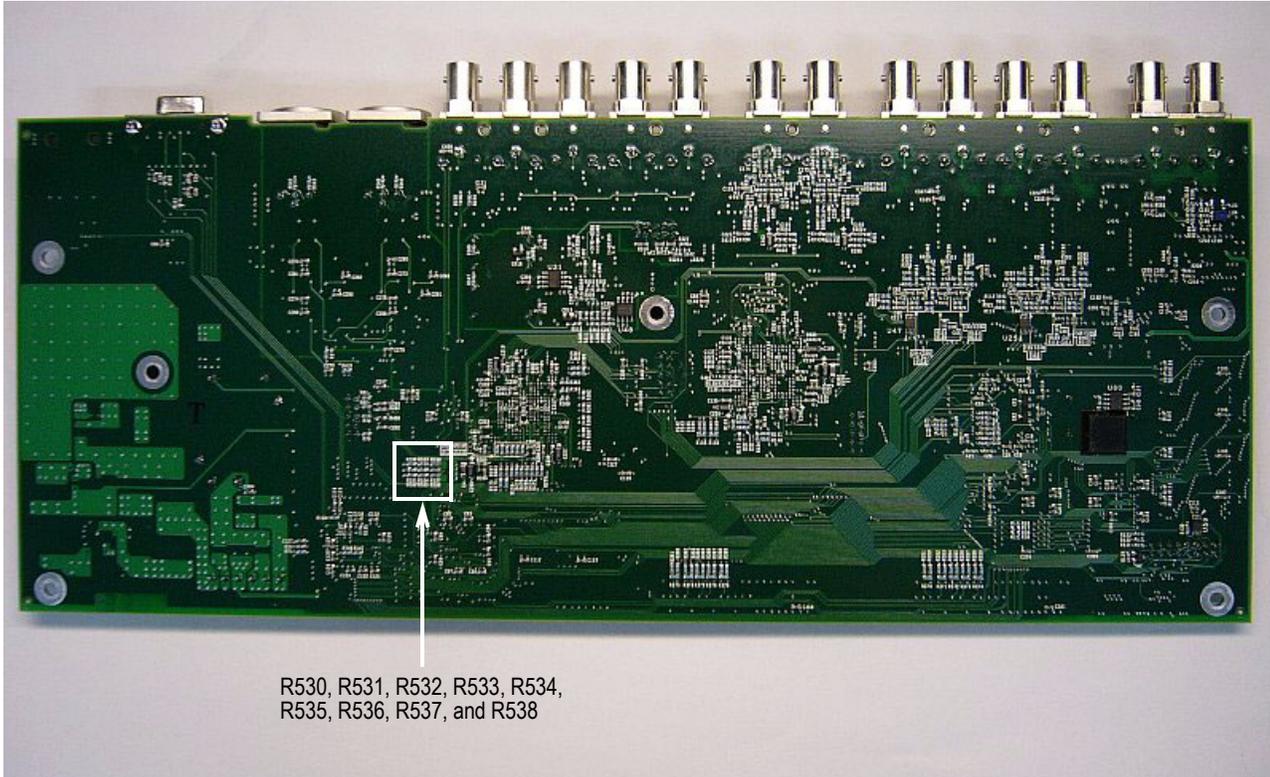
A10 Main board view (reverse side), showing location of the resistors
